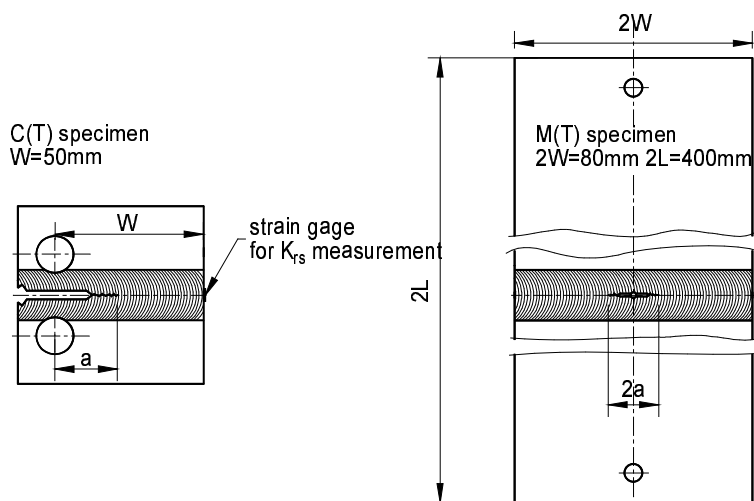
Specimen for fatigue crack propagation tests.
